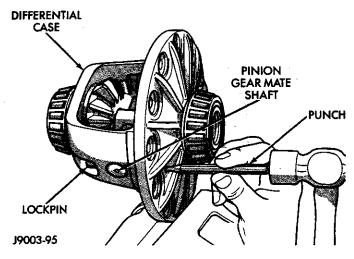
Pinion Gear Mate Shaft Lock Pin Removal
